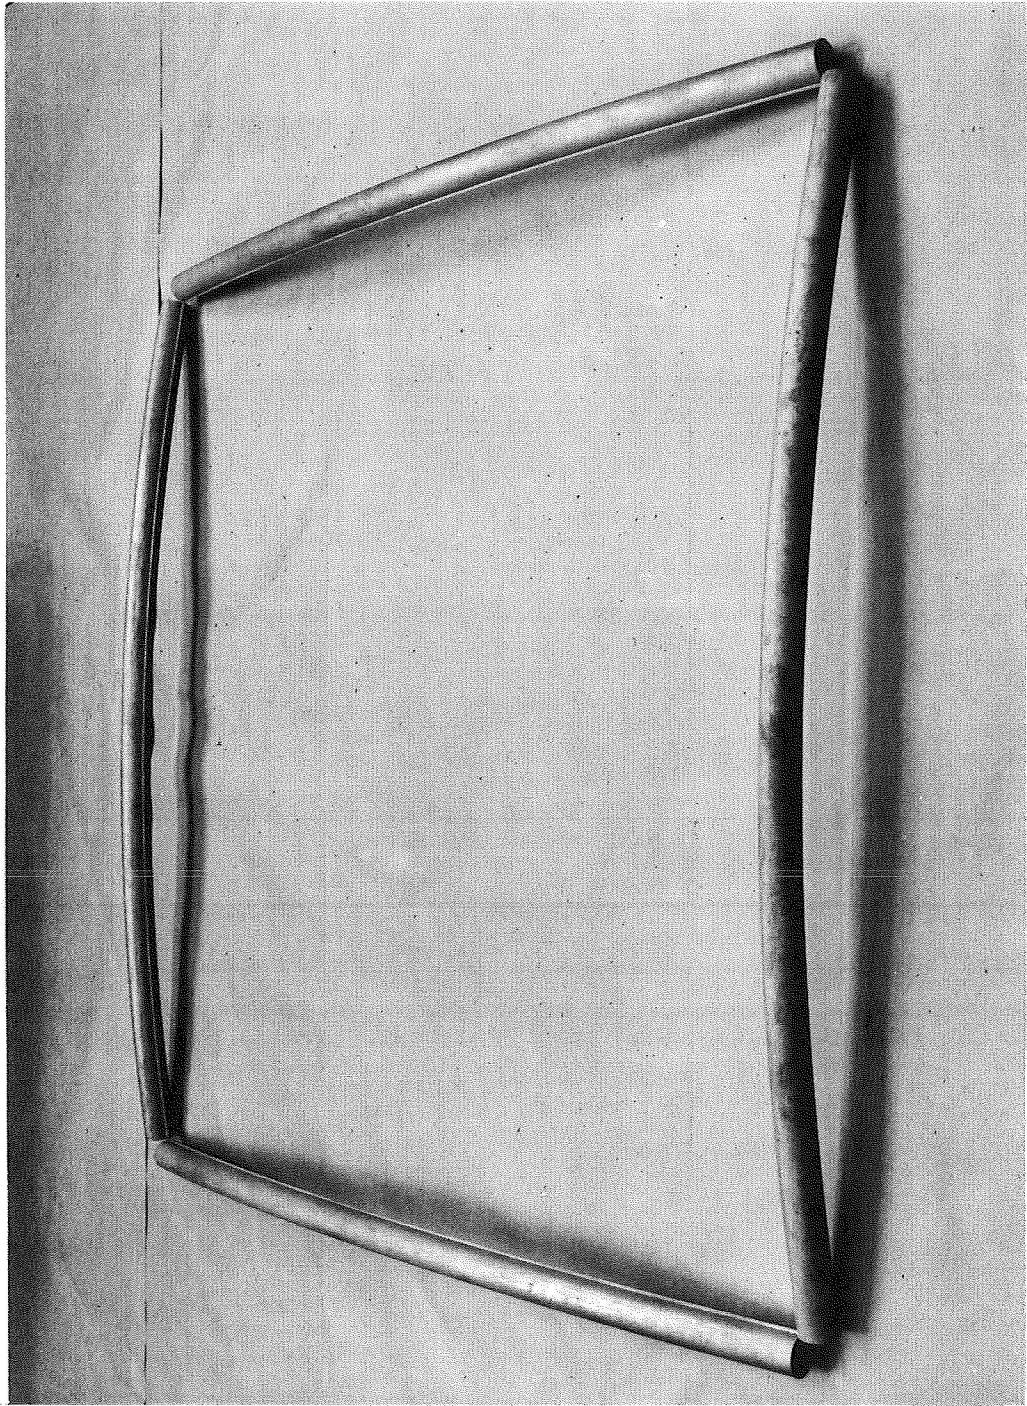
Completed Be Tube on Inspection Fixture
